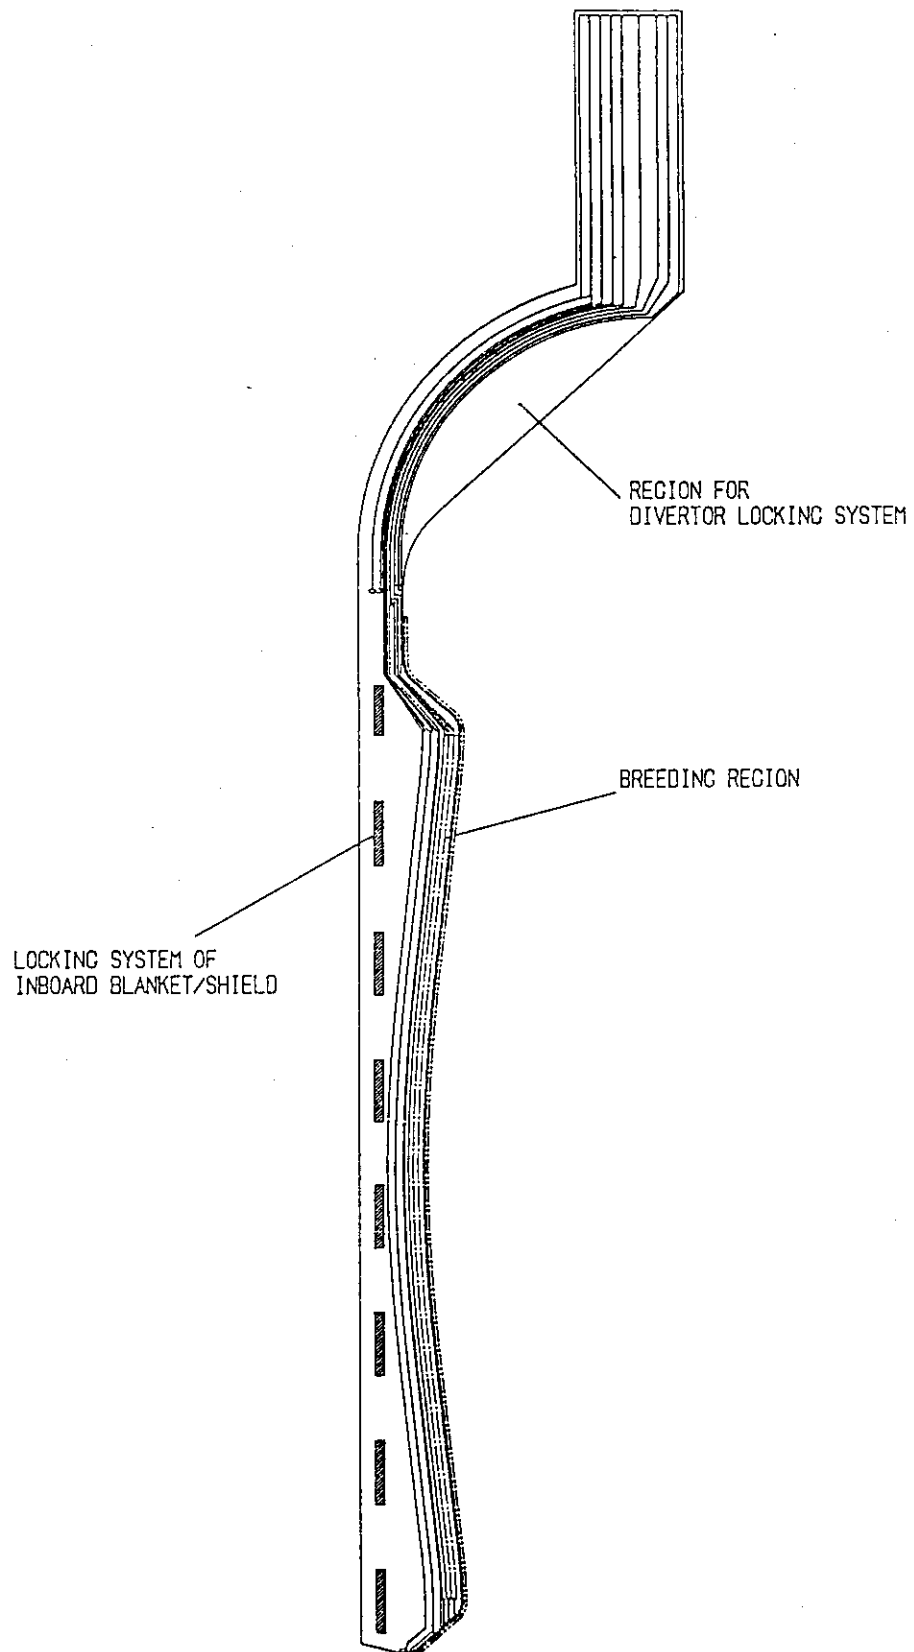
Elevation view of inboard mixed pebble bed blanket
